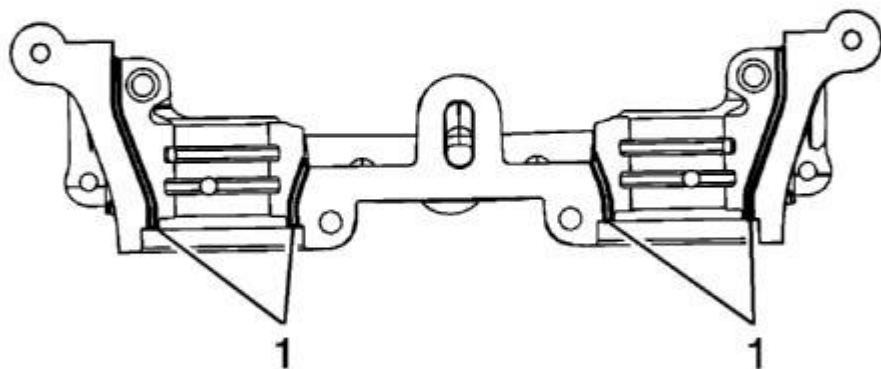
Sealing Surfaces Of Camshaft Bearing Cap
